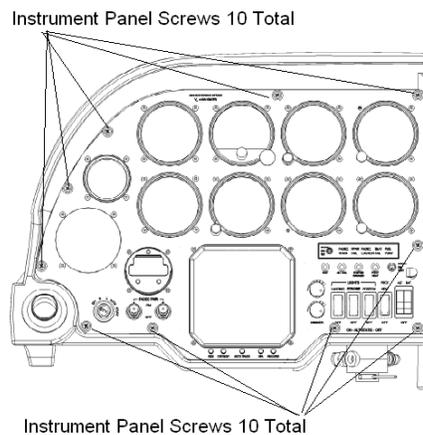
Location of the Ten Screws Securing The Instrument Panel
